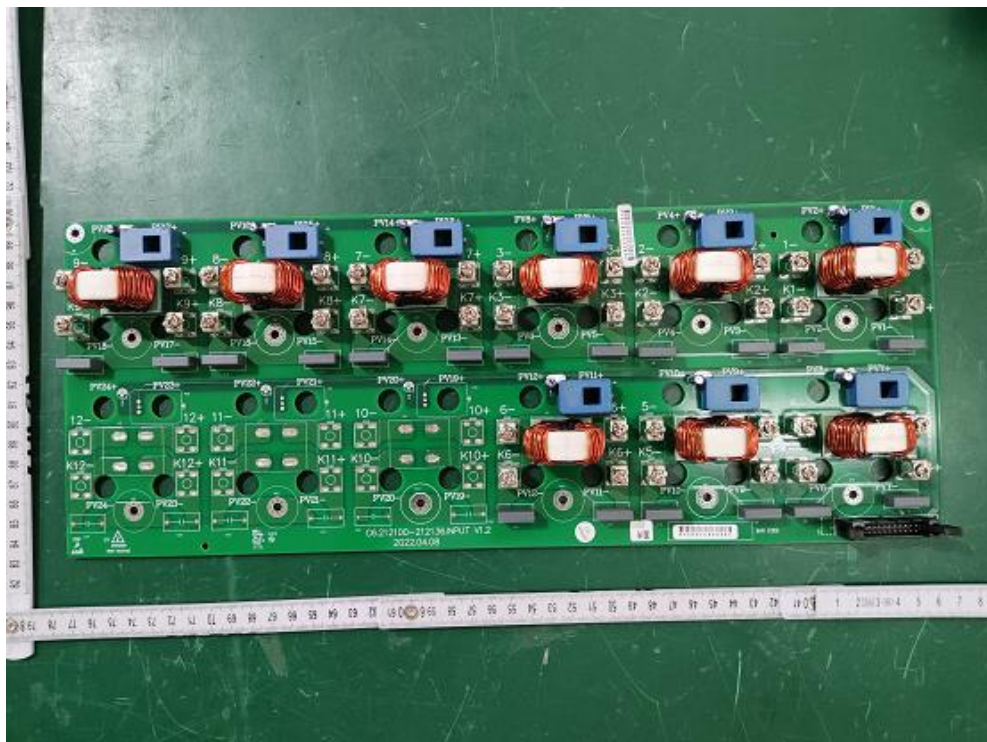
Front view of PV input board for C6-60K-T9-LV-40
